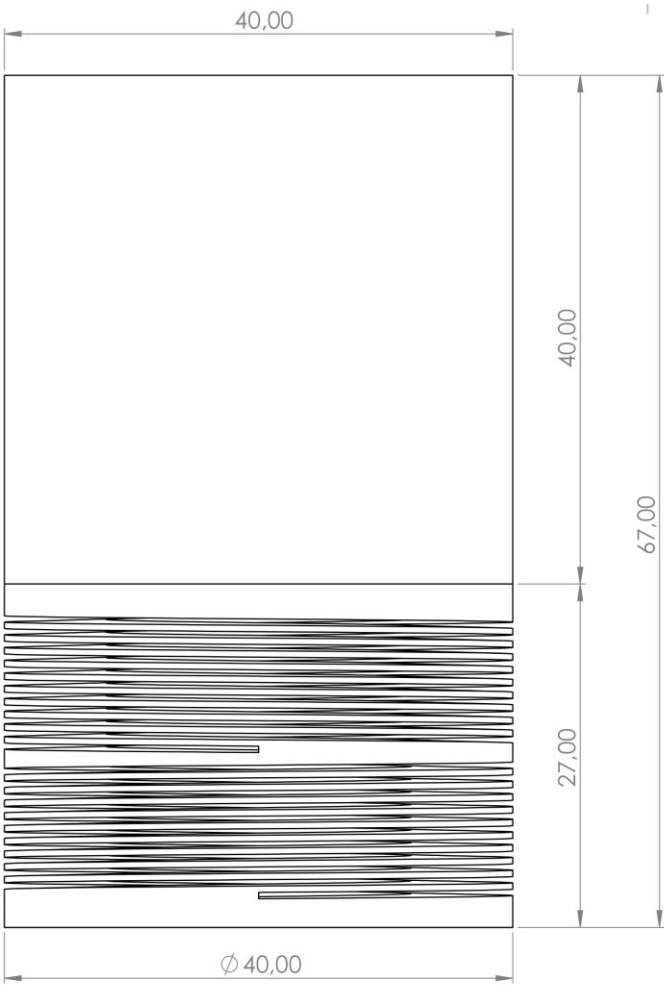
Dimensioned CAD of the Helical-C suspension model for the subsequent modal analysis
